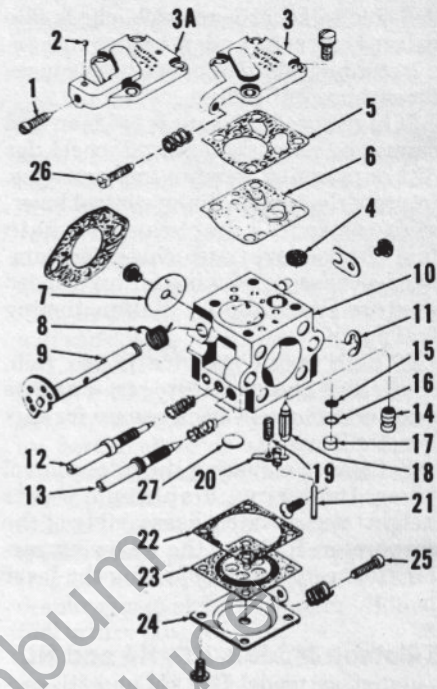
Exploded view of Tillotson model HU carburetor. Note difference in idle speed screw location used on fuel pump covers (3 & 3A) of some carburetors. Idle speed screw (25) may be located in cover (24).
